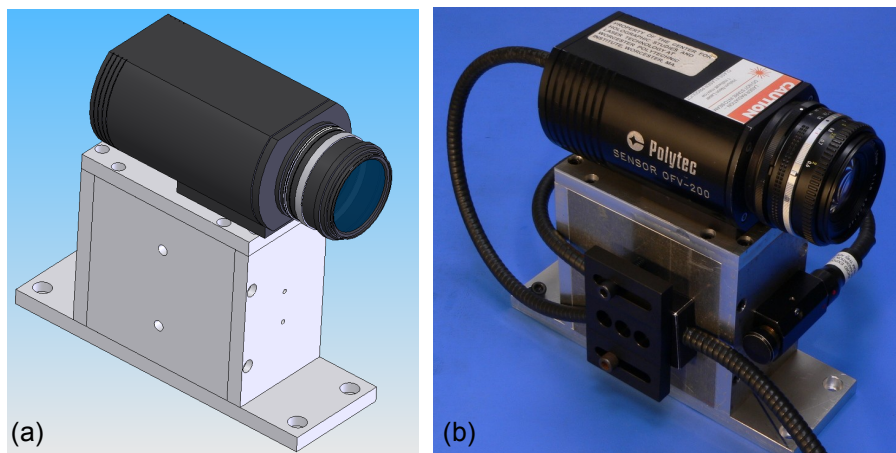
Vibrometer sensor module. (a) CAD model, (b) assembled unit.
